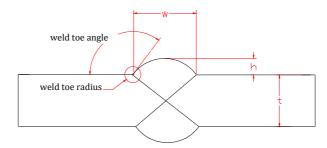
Dimension of butt welded joints: weld height h, weld width w, plate thickness t, weld toe radiusp, and weld toe anglev.
